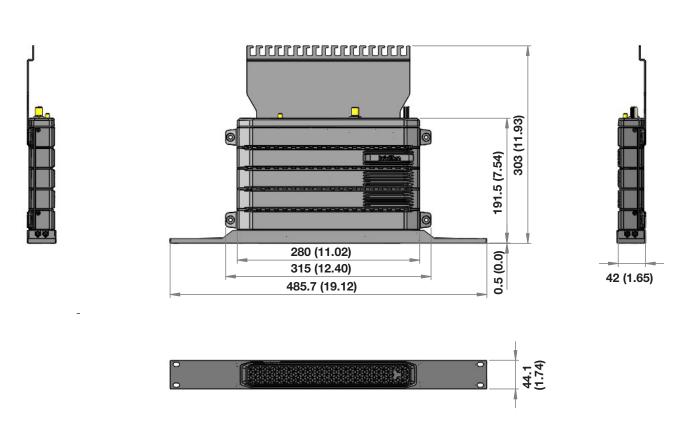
BDU Dimensions (19-inch Rack Mounting Type_Optional)
